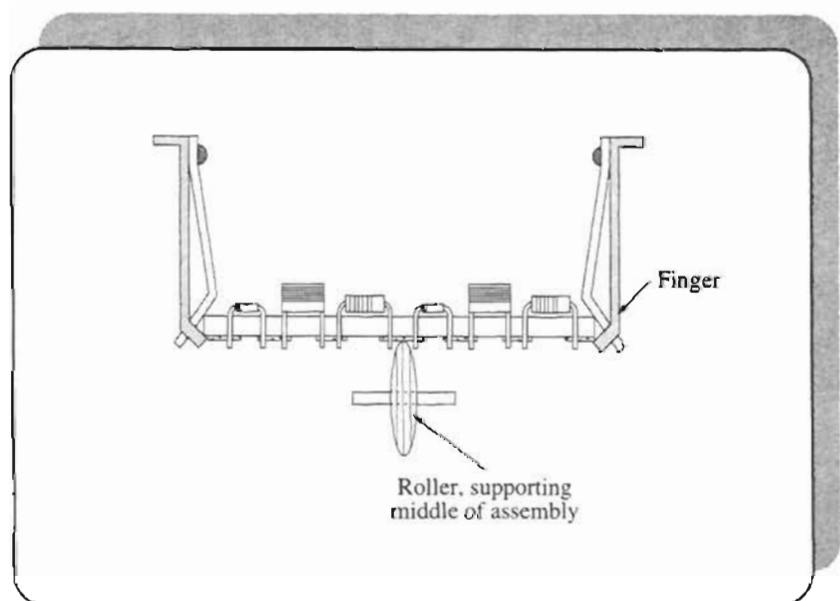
Roller used as a ski-bar to support large assemblies as they are conveyed through a soldering machine
